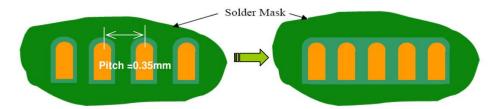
Between the pads, it's recommended to use "trench" type solder mask opening to design.
